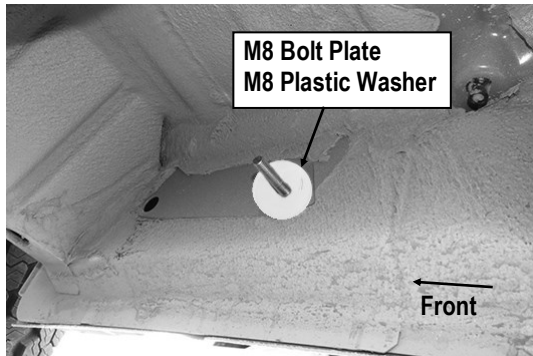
Driver Side Support Bracket Installed on Pinch Weld
